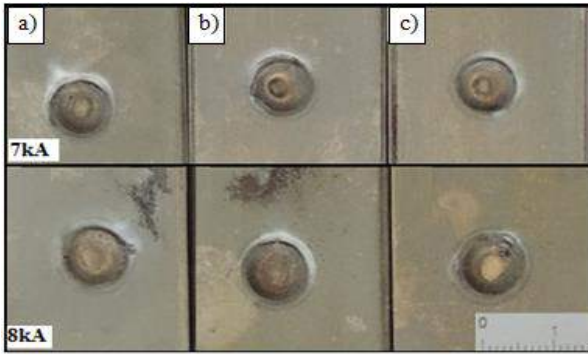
Fracture surfaces SRHT weldment joined with various welding time a) 15 cycles, b) 20 cycles, c) 25 cycles
